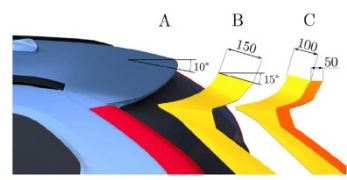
Close-up of the extensions with measurements in [mm]. The taper angle is referenced to the horizontal plane.
